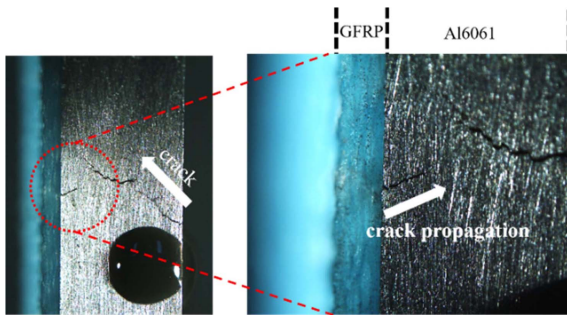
Fractography of GFRP-coated Al specimen at the fatigue test
